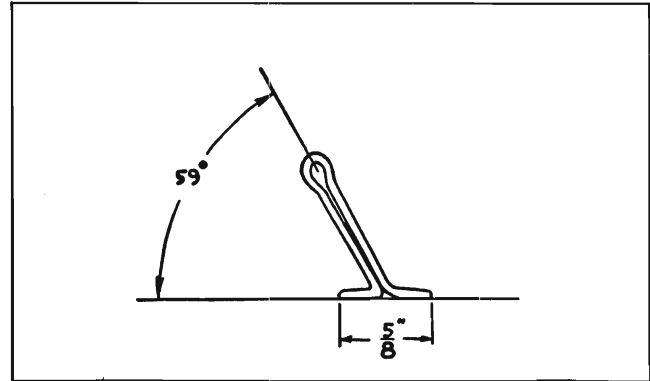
Tool for Removing Upper Half of Main Bearing
